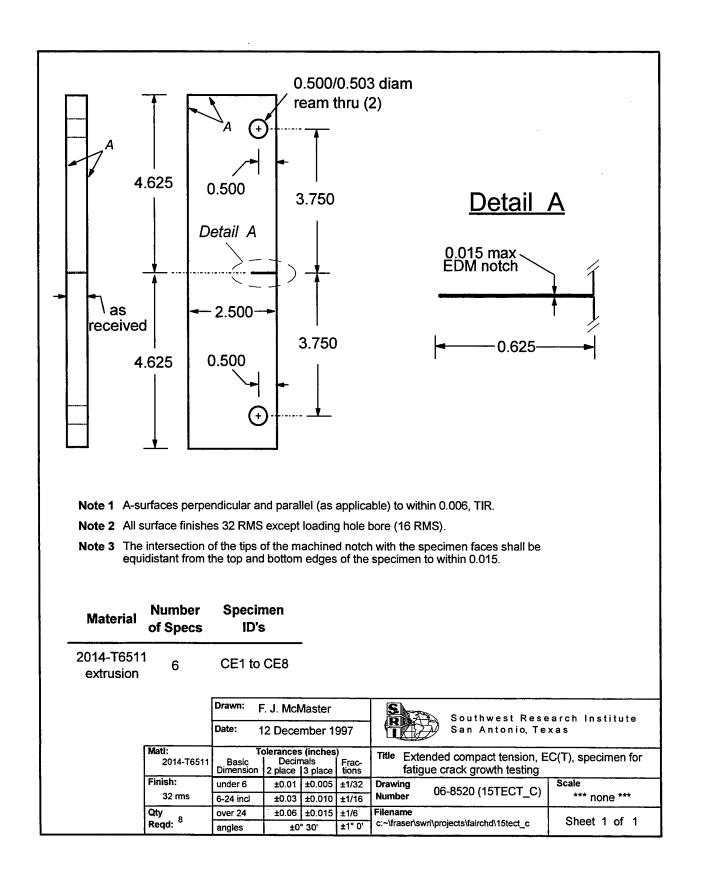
Design for the 1-T Plan Geometry Eccentrically Loaded Single-Edge Crack Tension Specimen for Fatigue Crack Growth Studies
